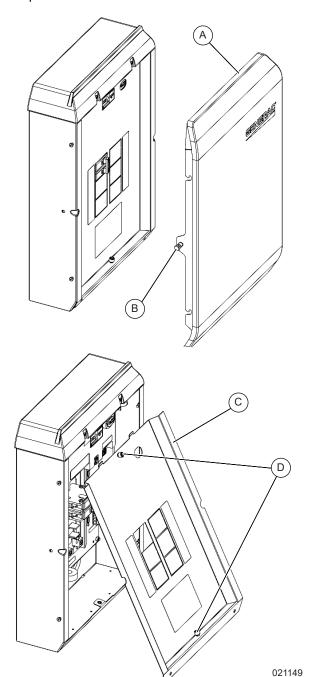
Removing Smart Combiner Front Cover and Dead Front
